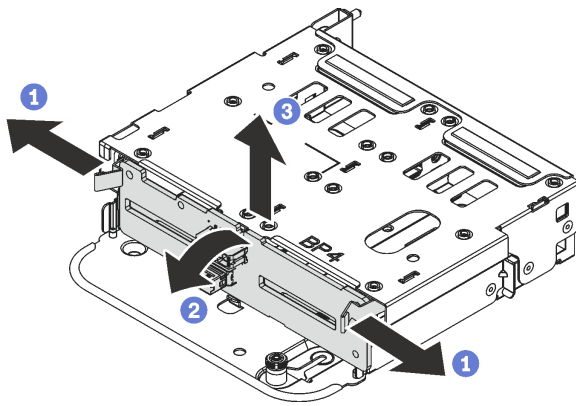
Removing the 4 x 2.5-inch rear drive backplane
